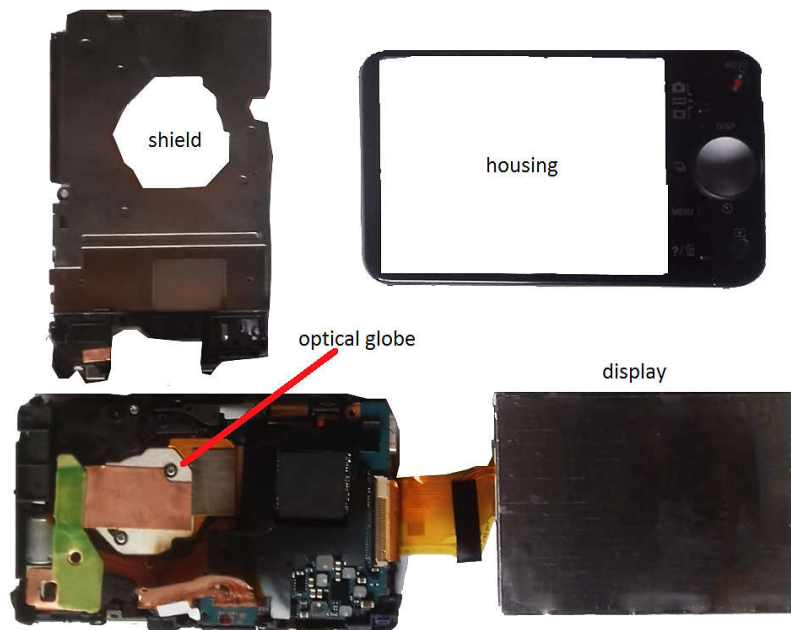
Open camera showing the housing, the shield, the undocked display and the optical globe still mounted.
